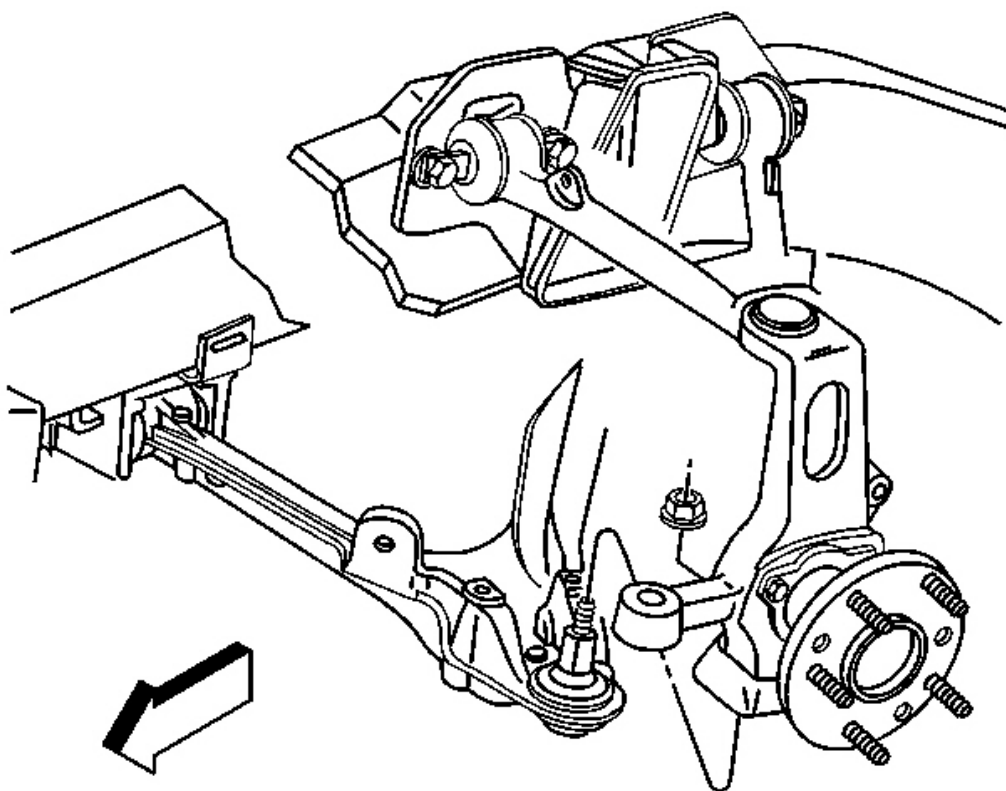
Lower Control Arm Stud, Steering Knuckle & Nut
